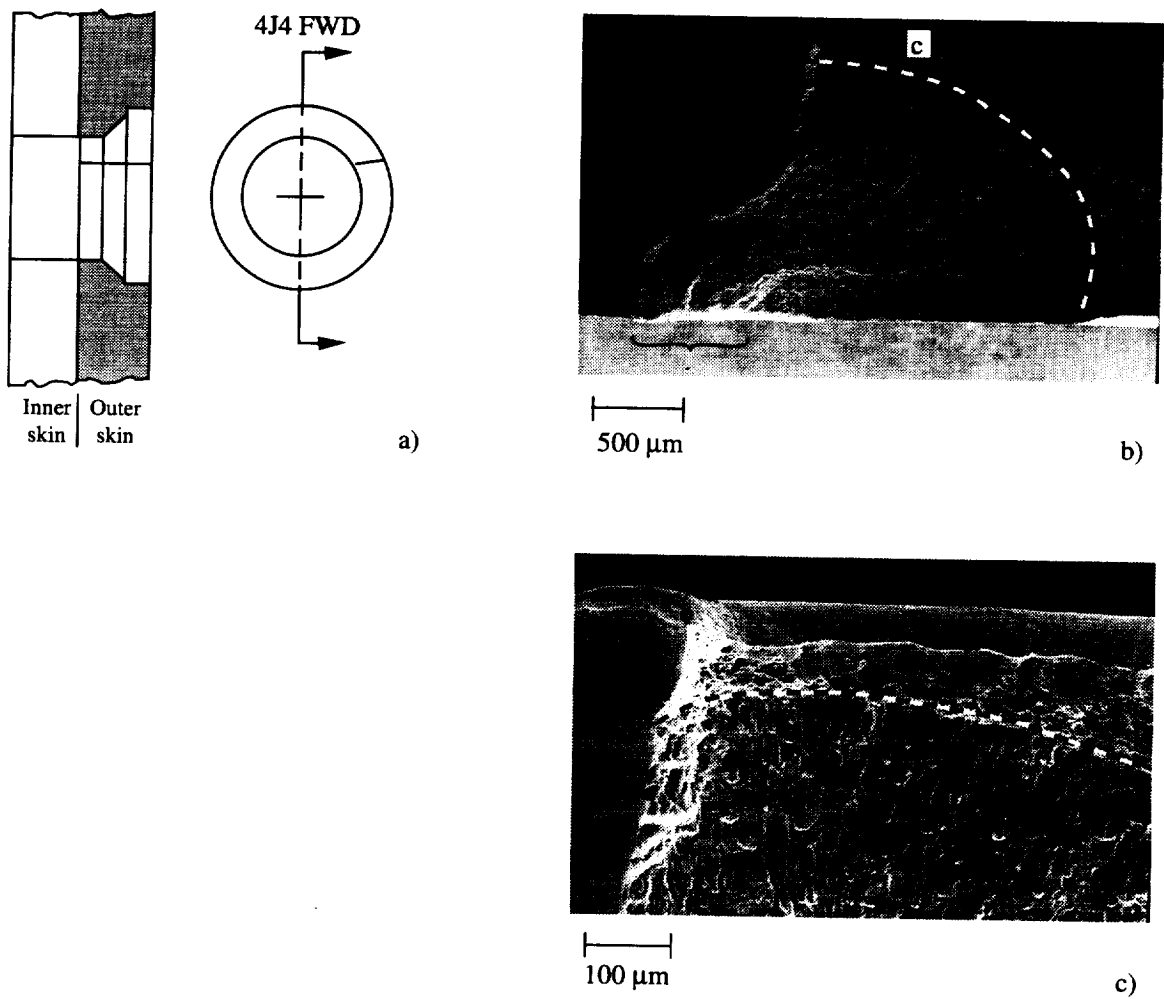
a) The schematic shows the rivet hole 4J4 configuration and the location of the outer skin fatigue crack oriented in the forward direction and about the 2 o'clock position. b) The SEM micrograph shows the fatigue crack fracture surface located at the outer skin rivet hole (left). The bracket shows the region of crack initiation and the dashed line marks the fatigue crack front. c) The SEM micrograph shows the fatigue crack front region "c" in Figure 11.14.b. The dashed line marks the fatigue crack front where it intersects the rivet hole (left). The outboard surface of the outer skin is located at the top of the micrograph.
